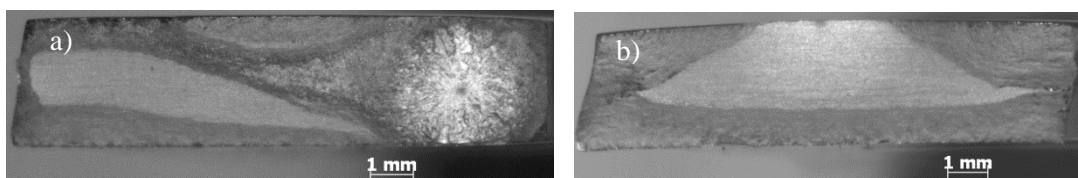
Representative macrographs of fracture surfaces for polished specimen that failed due to a) an internal void and b) polishing marks on the surface.
